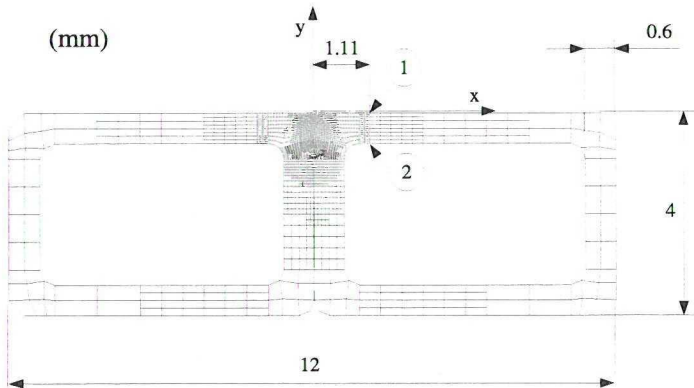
Two welded quadrilateral pipes, welded together
